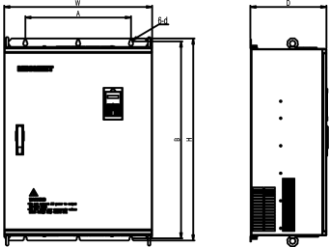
Outline, mounting dimensions for products of R9~R10
